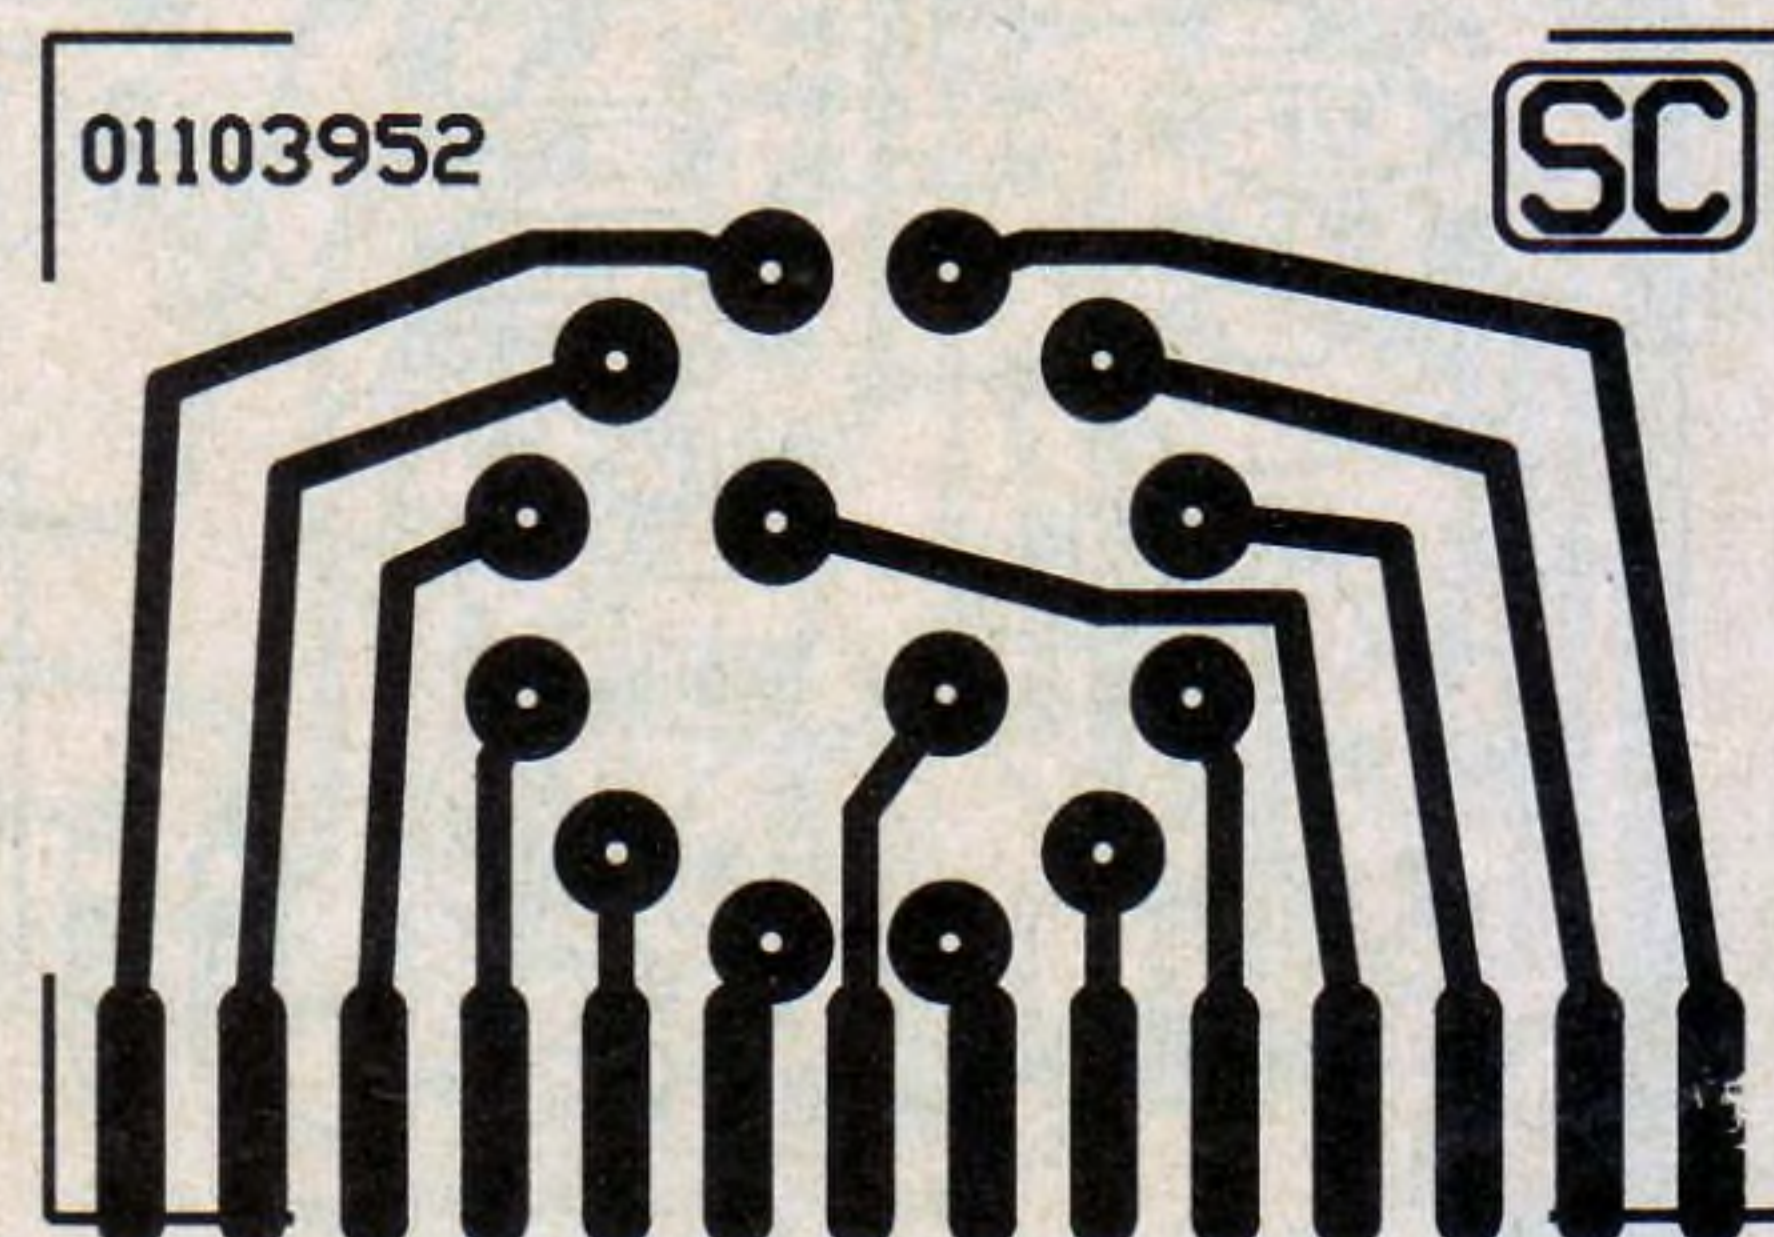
(b): the etching pattern for the selector switch board. Check that it has been trimmed correctly along the bottom, so that there are no shorts.
